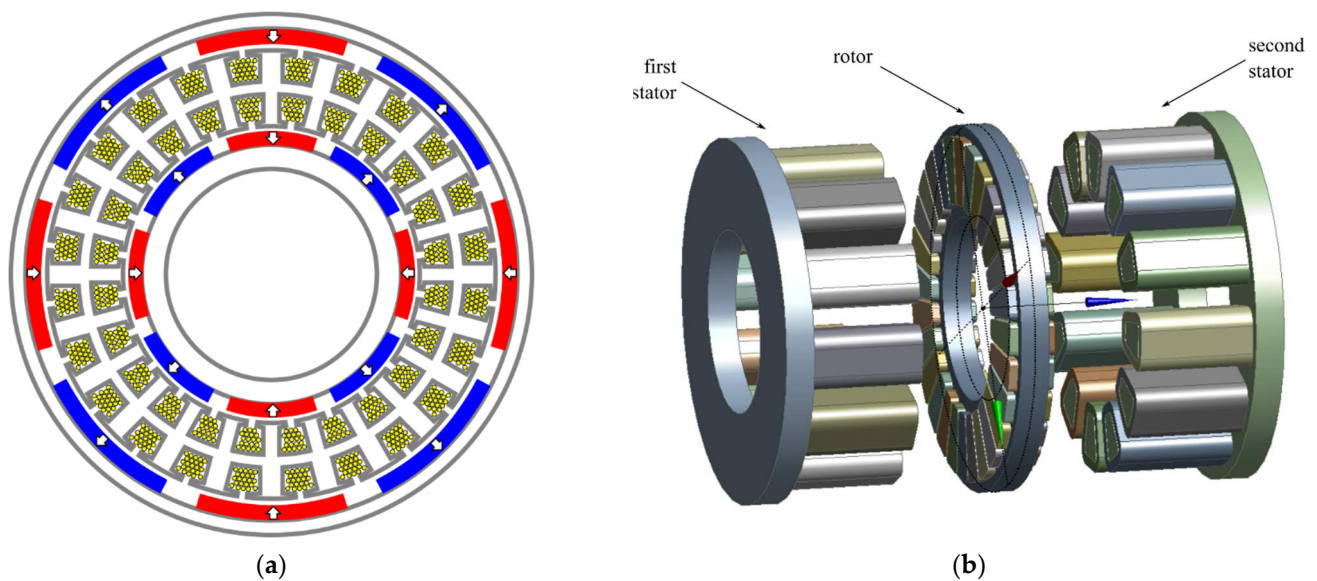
Double rotor and stator PM machines: (a) dual rotor radial field PM machine [73]; (b) double stator axial field PM machine [75]. This machine can have multiple stages, thus increasing the cooling complexity even further.
